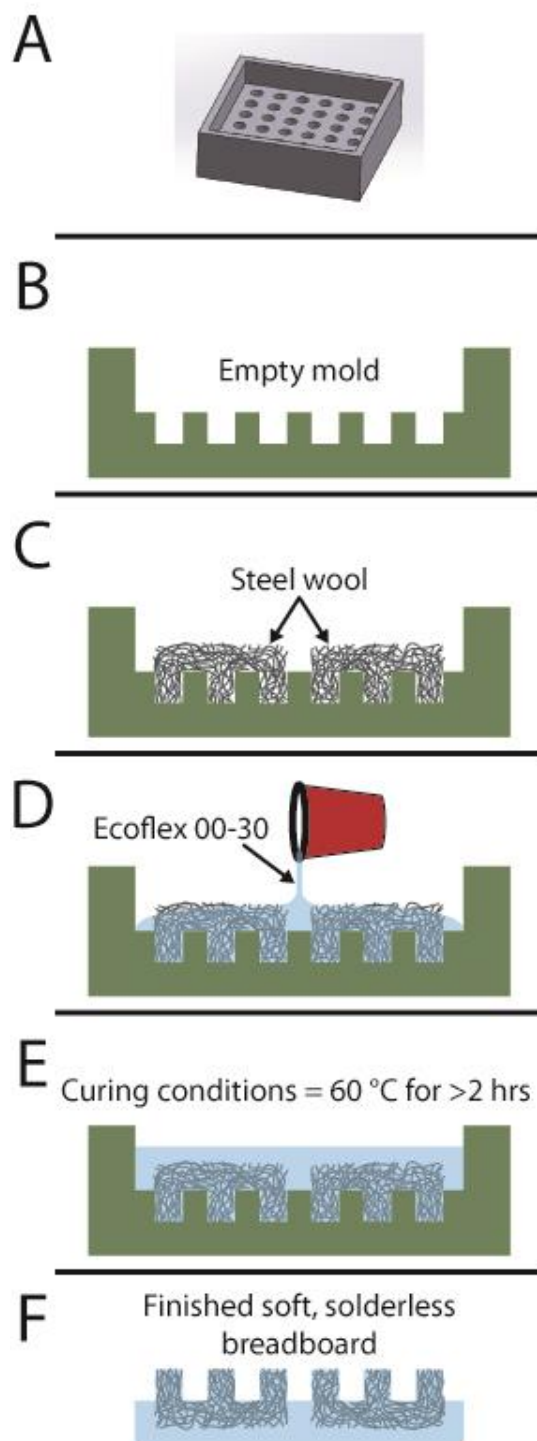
Fabrication of the Soft, Solderless Breadboard. (A) Perspective view of the mold. (B) Cross section of the mold before part fabrication. (C) Placement of steel wool to create conductive paths and connectors for electrical components. (D) Addition of uncured elastomer. (E) Curing of the elastomer. (F) Finished soft, solderless breadboard.
